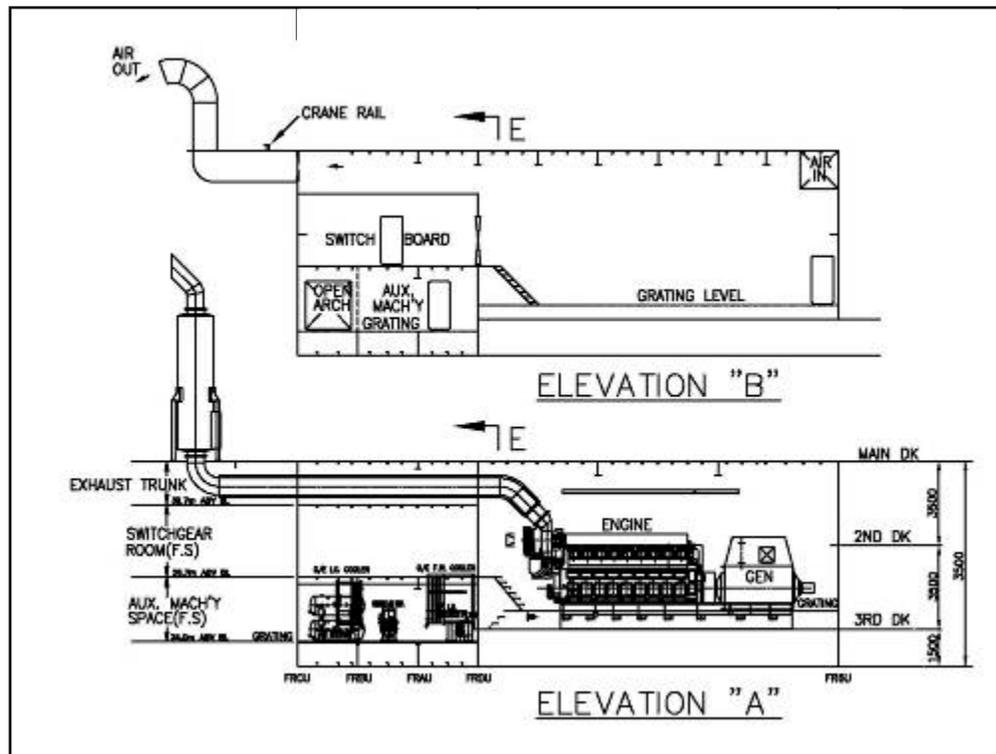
Engine Room Elevations (HRBS-058-000-P0609, rev.5)
